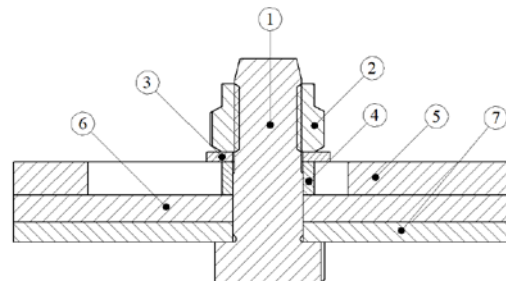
Perpendicular cross-section of the sliding bolted connection
